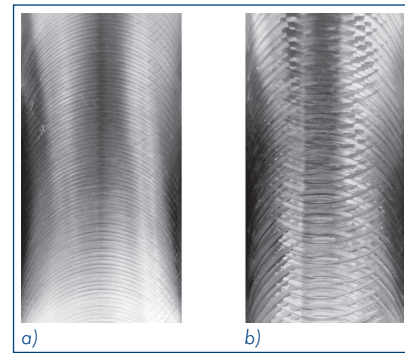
Workpiece surface: a) Controller on b) Controller off.
